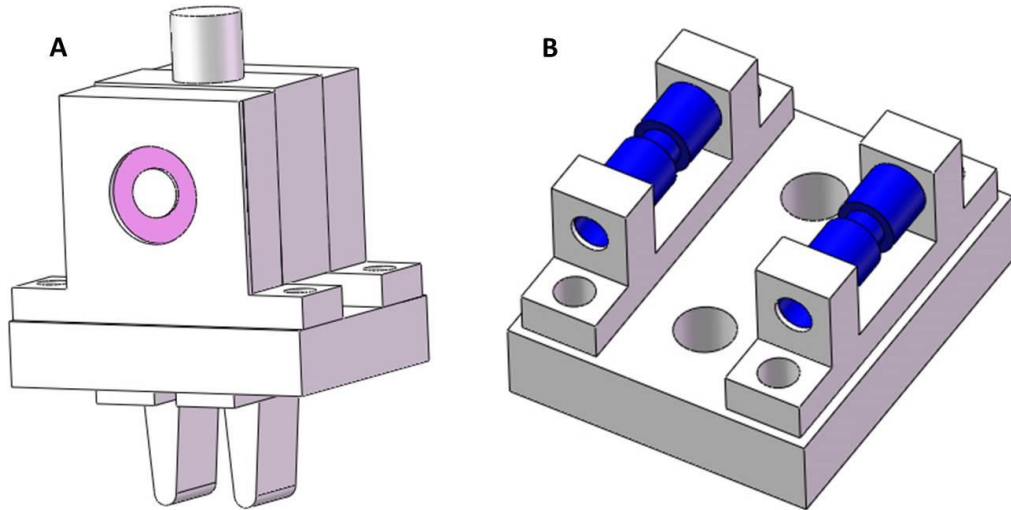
Detail designs of the upper loading pin system (A) and the bottom sample holder (B) in the four-point bending tester.
